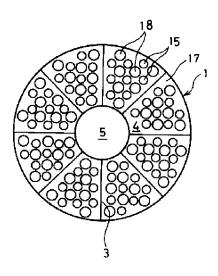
It is a top view showing the header in other embodiments of this invention. [Explanations of letters or numerals]
